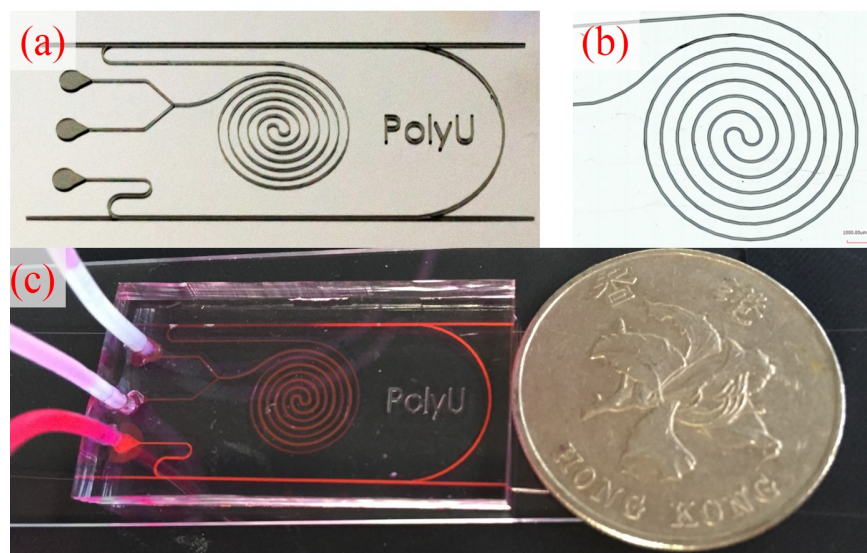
Photos of the SU-8 master mould for microfluidic chip fabrication (a) and its mixer part (b); the photo of real microfluidic chip fabricated by casting PDMS on the SU-8 mould and then sealed with glass slide by using O_2 plasma (c).
